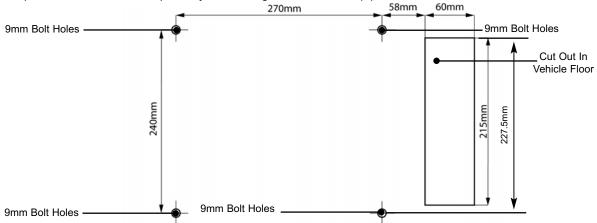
Cut Out Hole in Floor - Underfloor Installation
